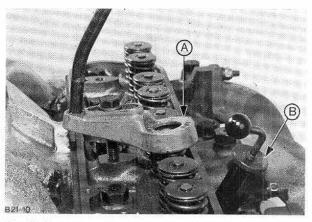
Removing valve springs using Special Tool. A – Special Tool G2-6513-A. B – Special Tool G2-6513-B.
